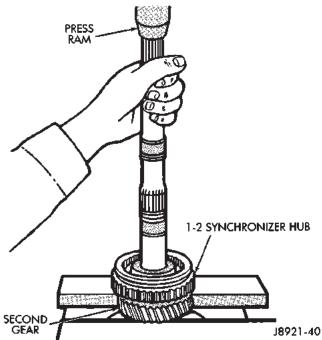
Remove Second Gear, Reverse Gear, And 1–2 Synchronizer
